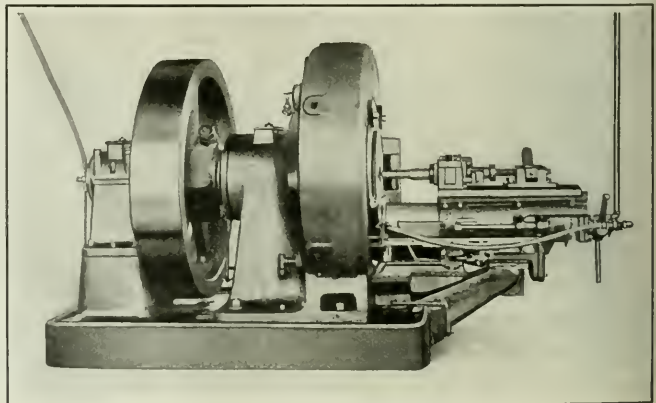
Swaging Heavy Work on a Machine having a Pneumatically Operated Work-holder and Hydraulic Feeding Mechanism
